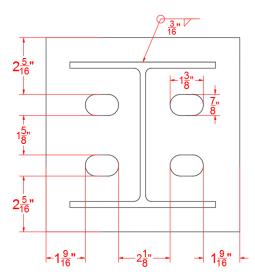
Plan View of Fully-Welded Plate Bracket without Top Rail
